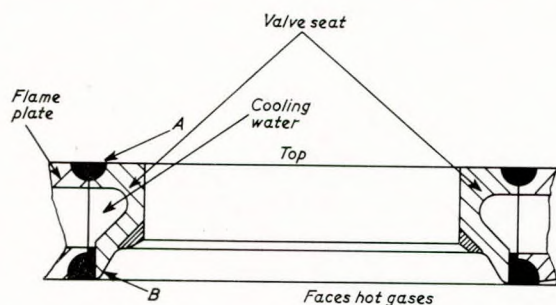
Illustration of welded joint between exhaust valve seats and flame plate
